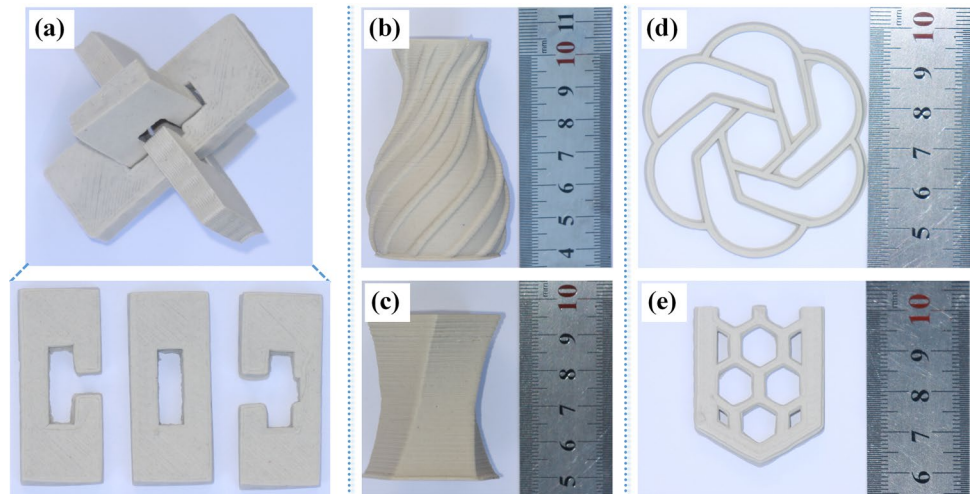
Demonstration parts of sintered ceramic clay manufactured using LDM technology. a Lupin lock. b, c Vase. d, e Two-dimensional flat model
